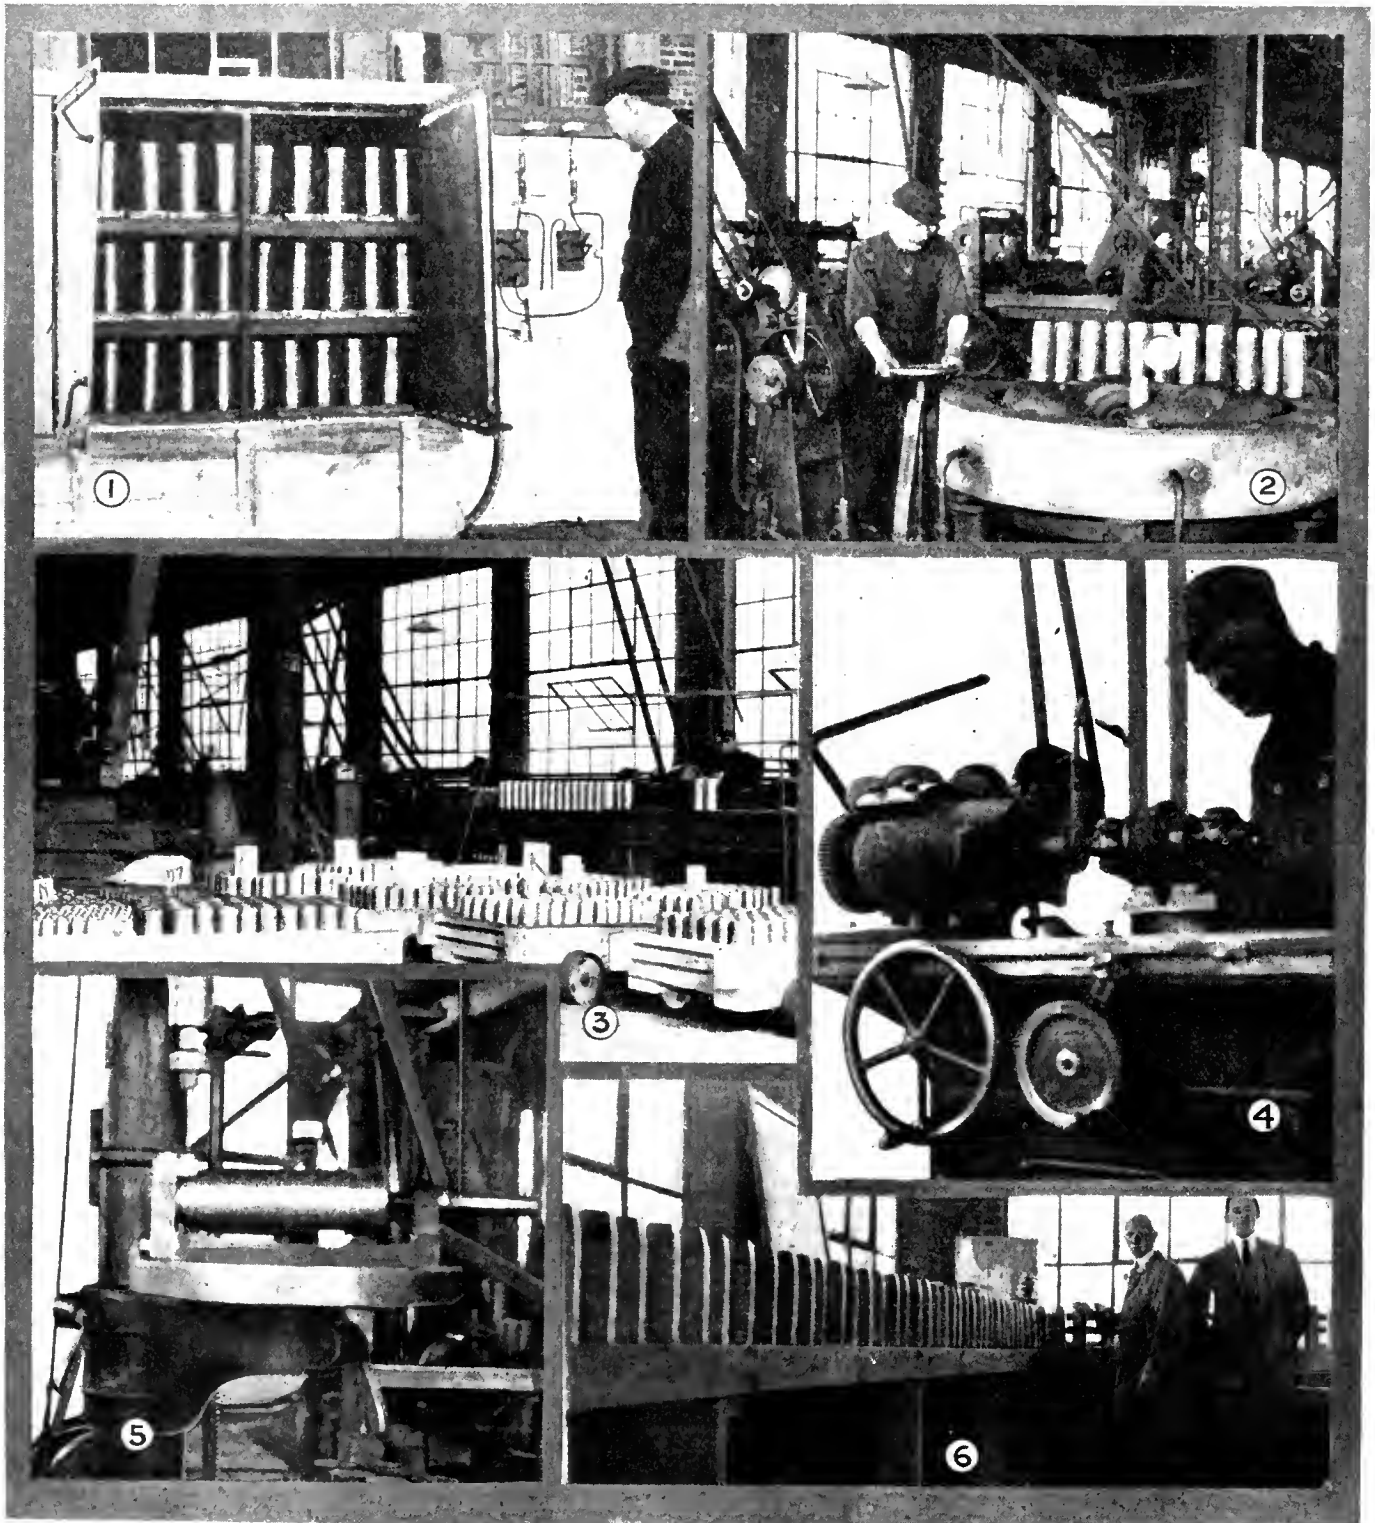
ELECTRIC OVEN SHOWING SHELLS IN PROCESS OF BAKING. (2)—MARSH & HENTHORN HYDRAULIC BANDING PRESS. (3)—LOTS OF SHELLS READY FOR TESTING. (4)—UNIVERSAL GRINDER CONVERTED INTO THREAD MILLER. (5) SPECIAL JIG WITH SHELL IN PLACE FOR DRILLING GRUB SCREW HOLE. (6) GOVERNMENT INSPECTION DEPARTMENT.
